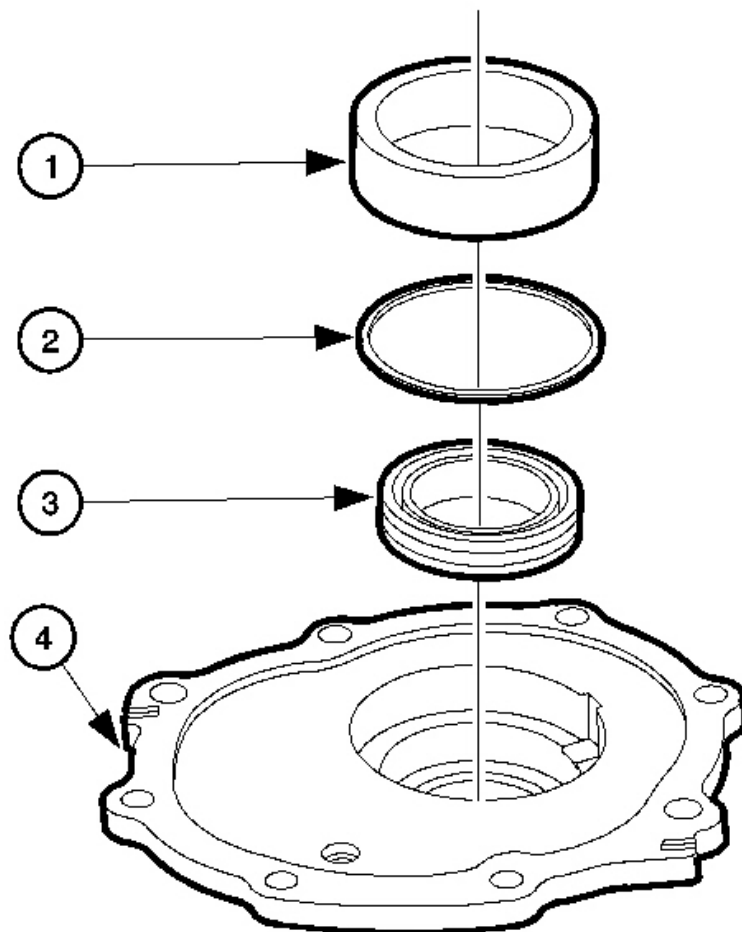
Removing Bearing Cup, Shims, and Seal From The Cover
